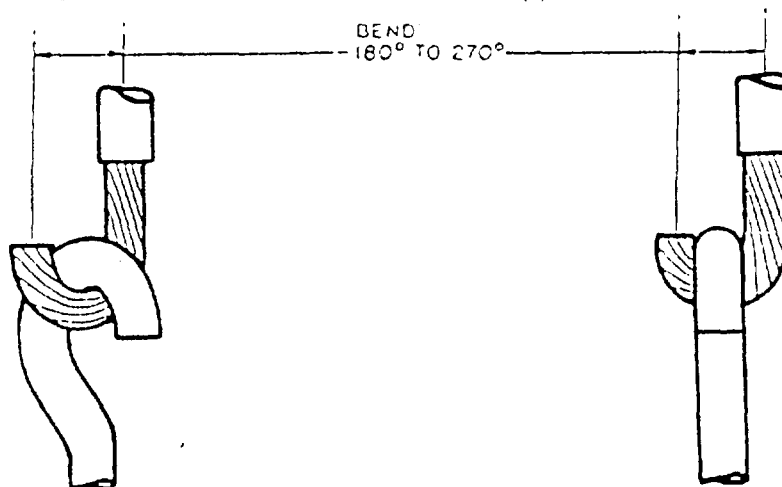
Hook terminal connections (see 5.3.21.7).
